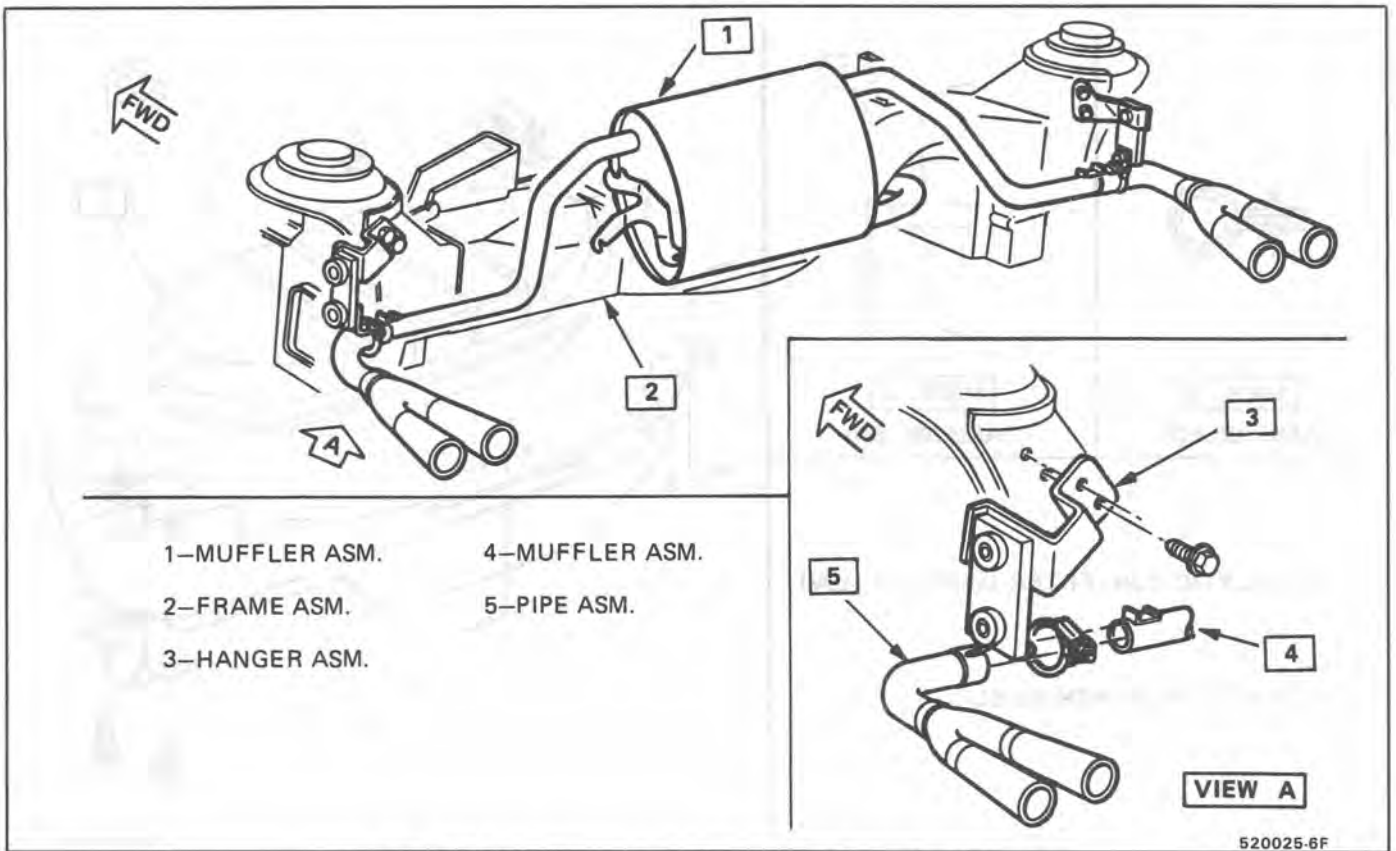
Muffler Assembly and Tailpipe Extension (LR8)
